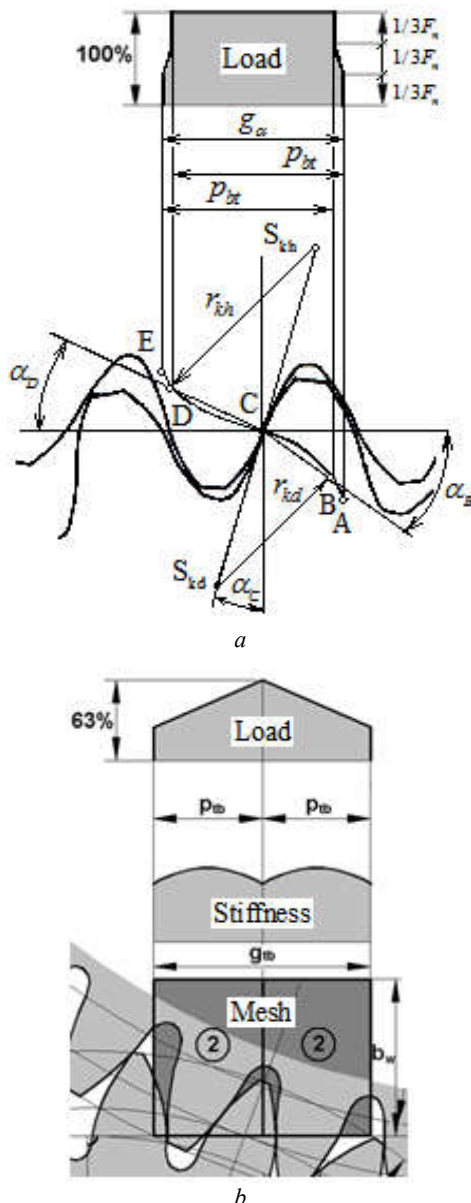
The course of load – bearing forces in the teeth engagement:
